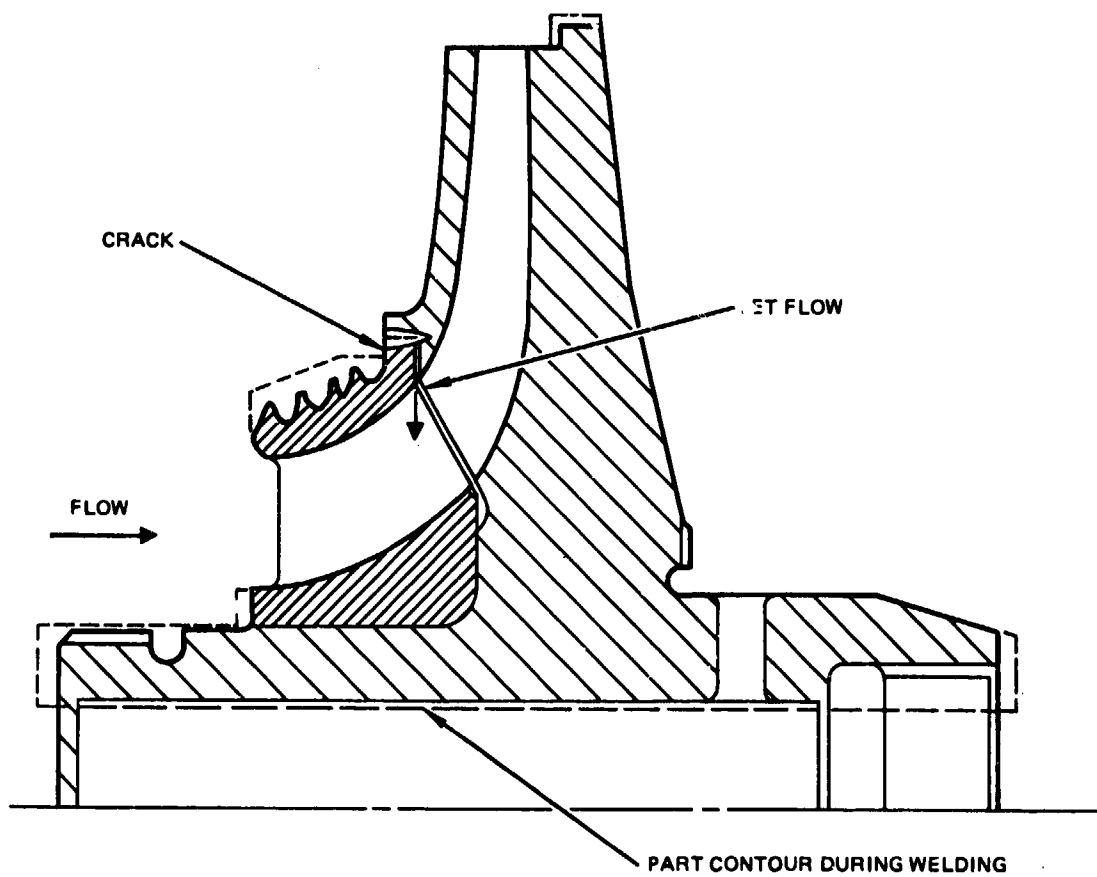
Mark 48-F Welded Impeller Configuration Flow Pattern
